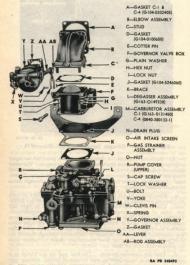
Carburetor, Governor, Governor Valve Box, and Carburetor Elbow
